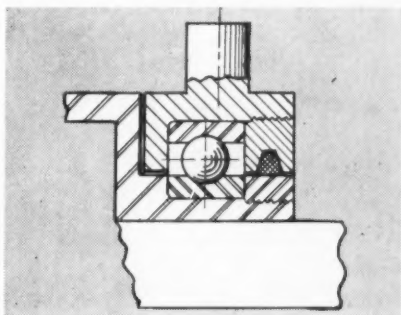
To minimize friction, a ball bearing is employed in some designs of shifting collars.
